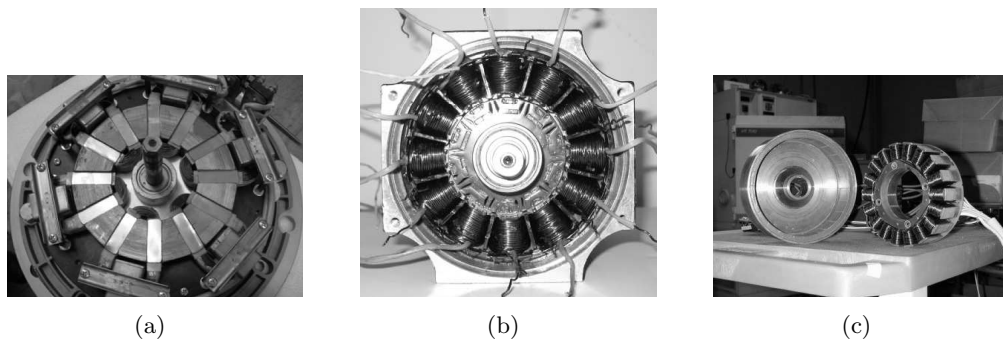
Machine topologies: (a) axial flux machine, (b) radial flux machine with internal rotor, (c) radial flux machine with external rotor.
